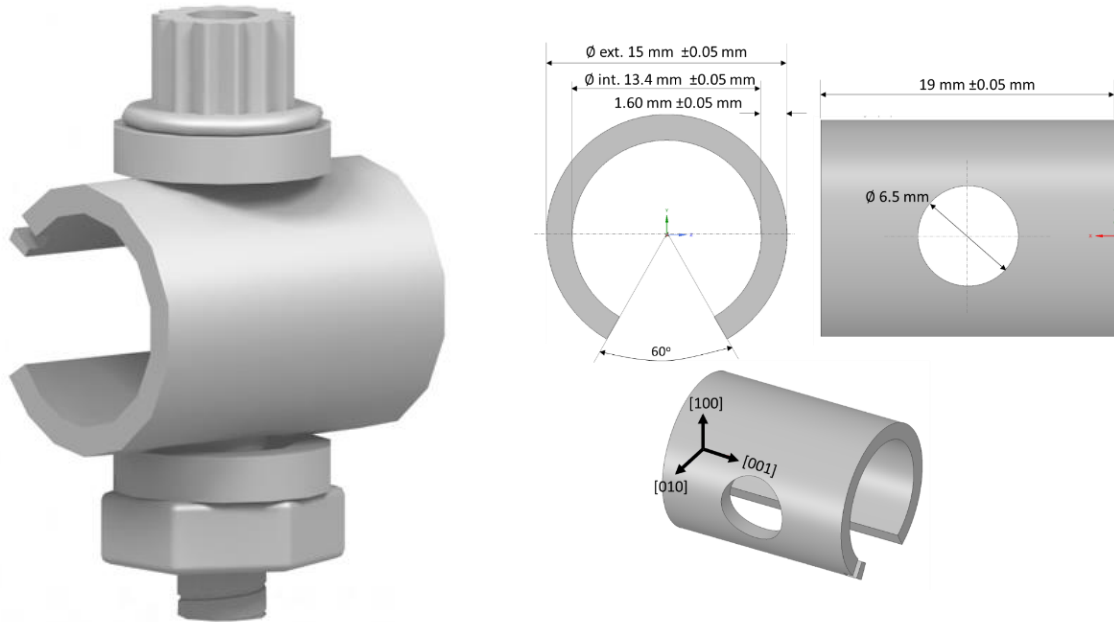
Dimensions of C-ring specimen used throughout this thesis
